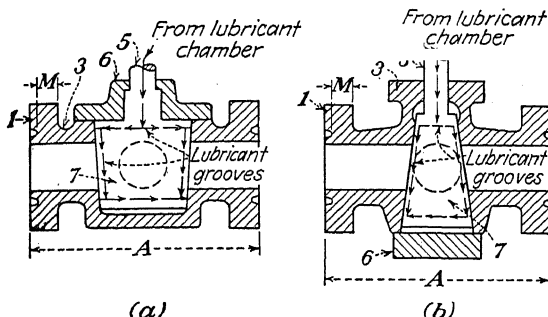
Flanged steel plug valves: (a) round-port full-bore type, (b) inverted tapered-plug, round-port, full-bore type. (1) ring-groove facing; (3) body; (5) plug stem; (6) cover; (7) plug; (M) basic (minimum) flange thickness.
